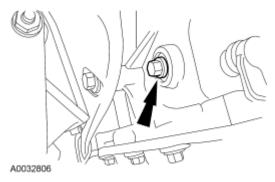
Locating Engine Plug Bolt Courtesy of FORD MOTOR CO.
